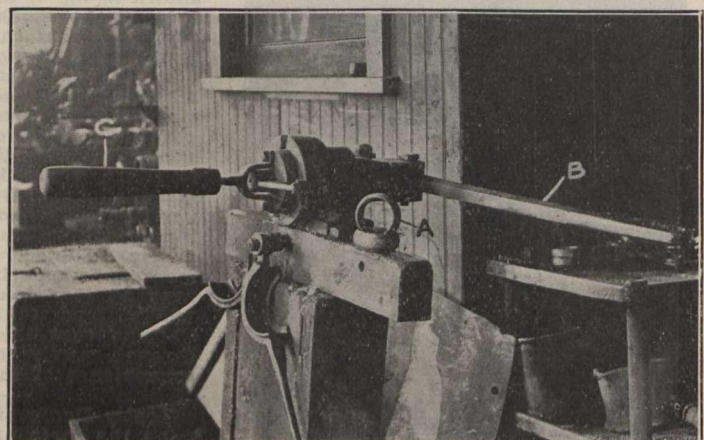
Mould for Piston Rod Packing with Samples of Work.
